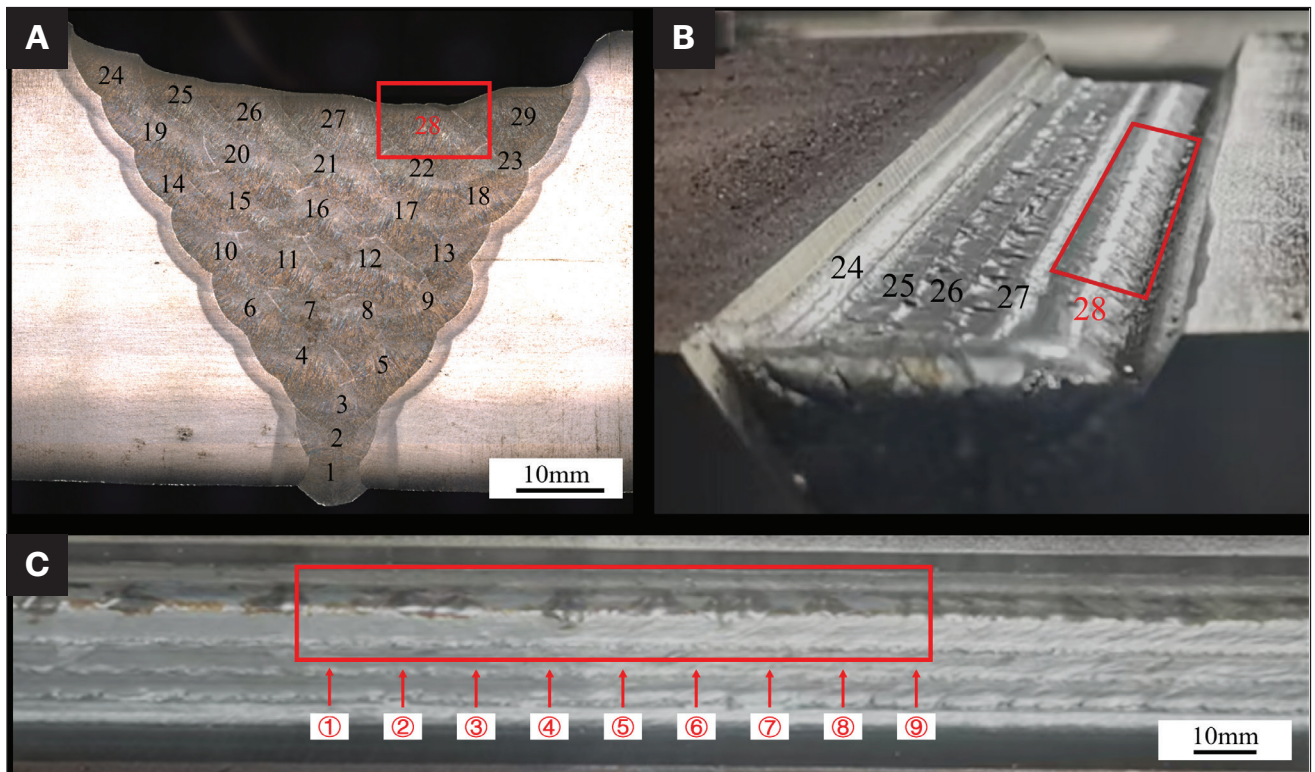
The weld beads for verifying accuracy: A – The distribution of weld beads in groove; B – the condition of bead 28; C – the selected position in the as-welded bead.
